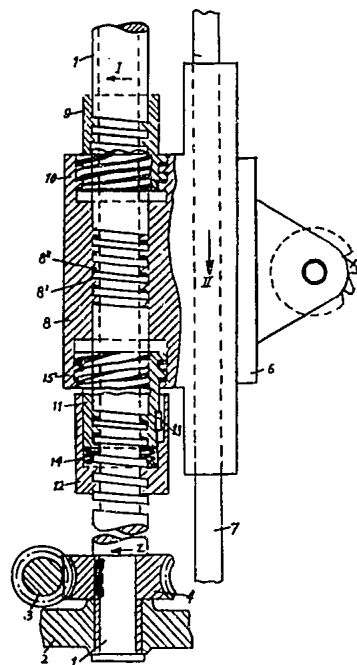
Mechanism for Eliminating Gap between Nut and Lifting Screw
